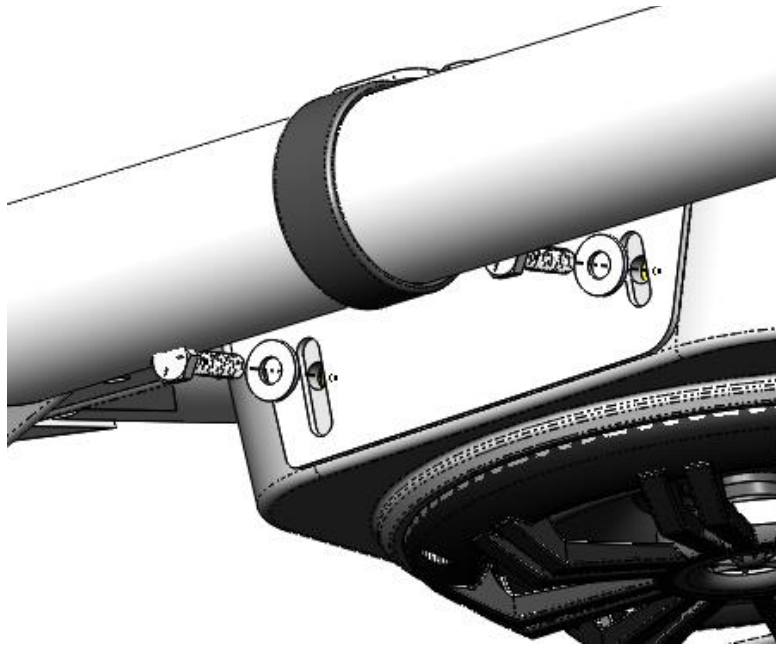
Mounting location of the *Audio Mini* bracket.
